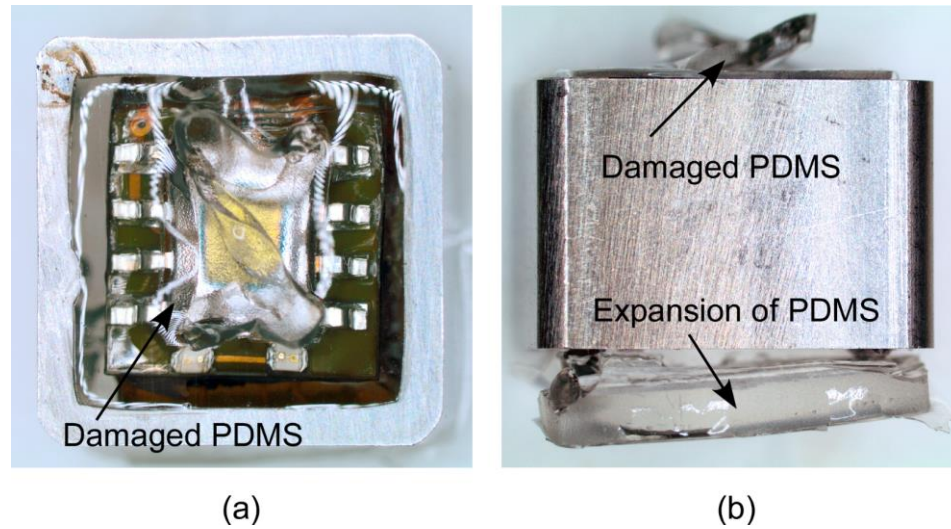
Photos of a package damaged by Isopar™-L after HPHT test: (a) top view; (b) bottom view.
